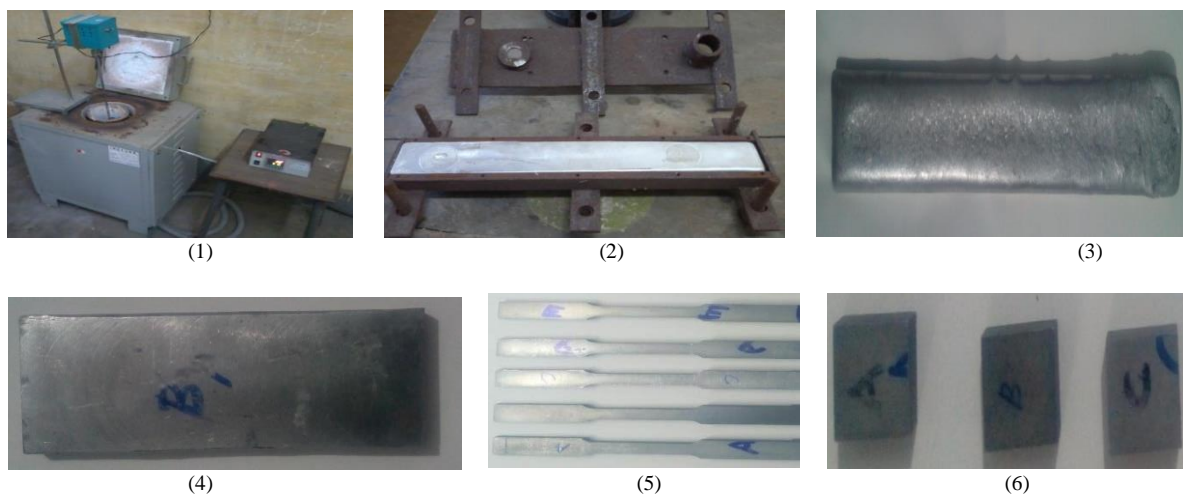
Stir casting Furnace, 2. Mould 3. casting sample, 4. Pre machined sample, 5. Tensile Specimens, 6. Hardness Samples.
